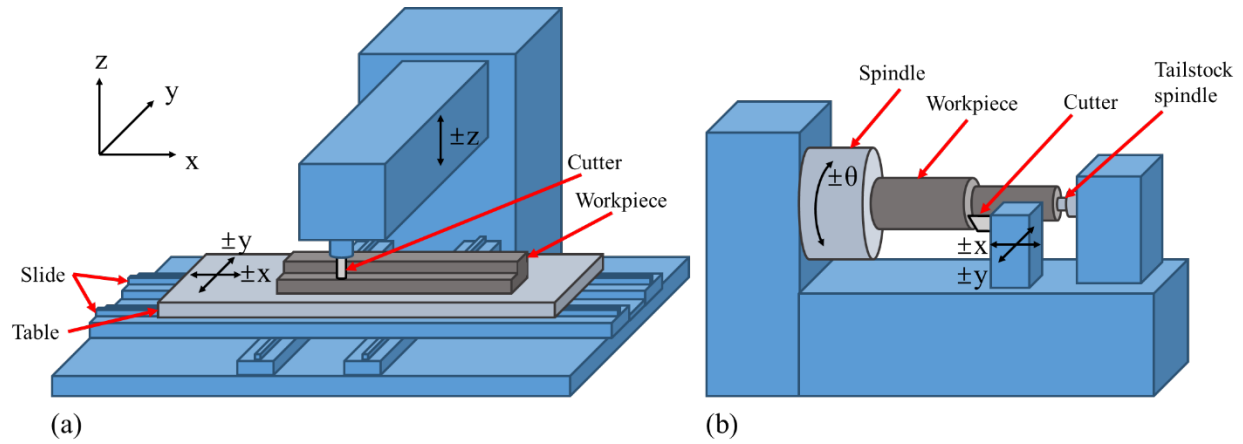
(a) An example of a milling machine, (b) an example of a turning machine
